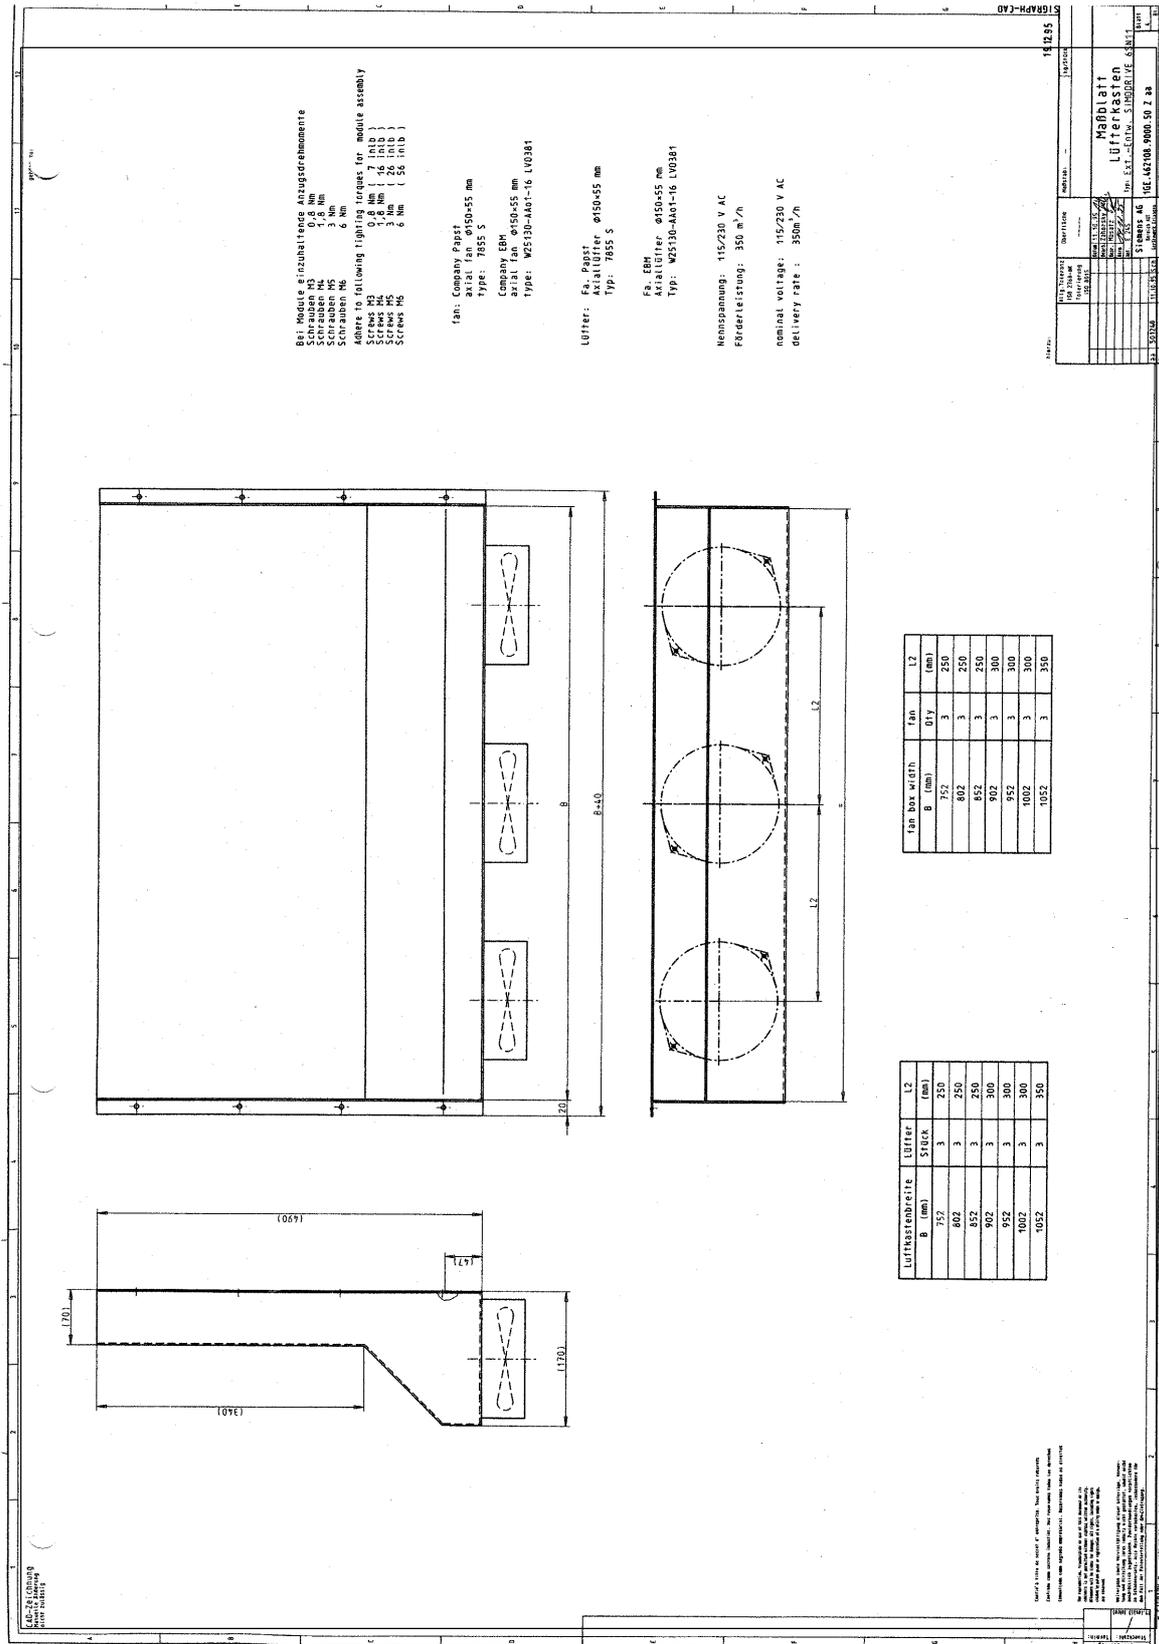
Fan assembly, ext. cooling, 1GE.462108.9000.50 Z aa, Sheet 4
